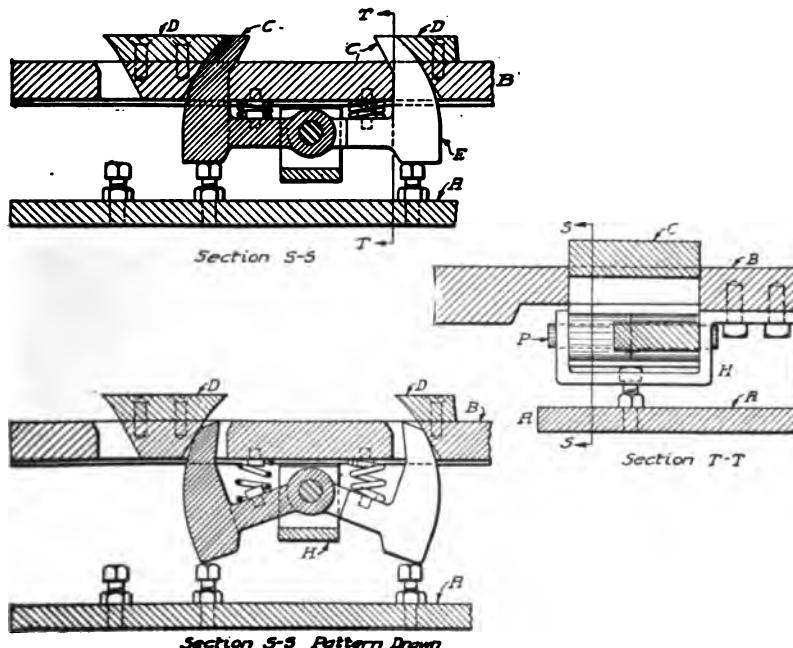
Sections Showing Mechanism of Machine with Pattern in Place for Molding and with Pattern Drawn or Rolled Back
